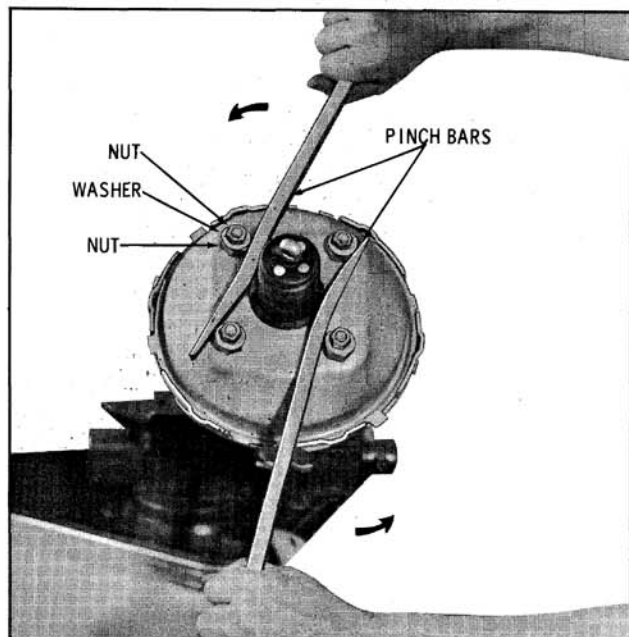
Separating Housing (without a Mounting Bracket)
